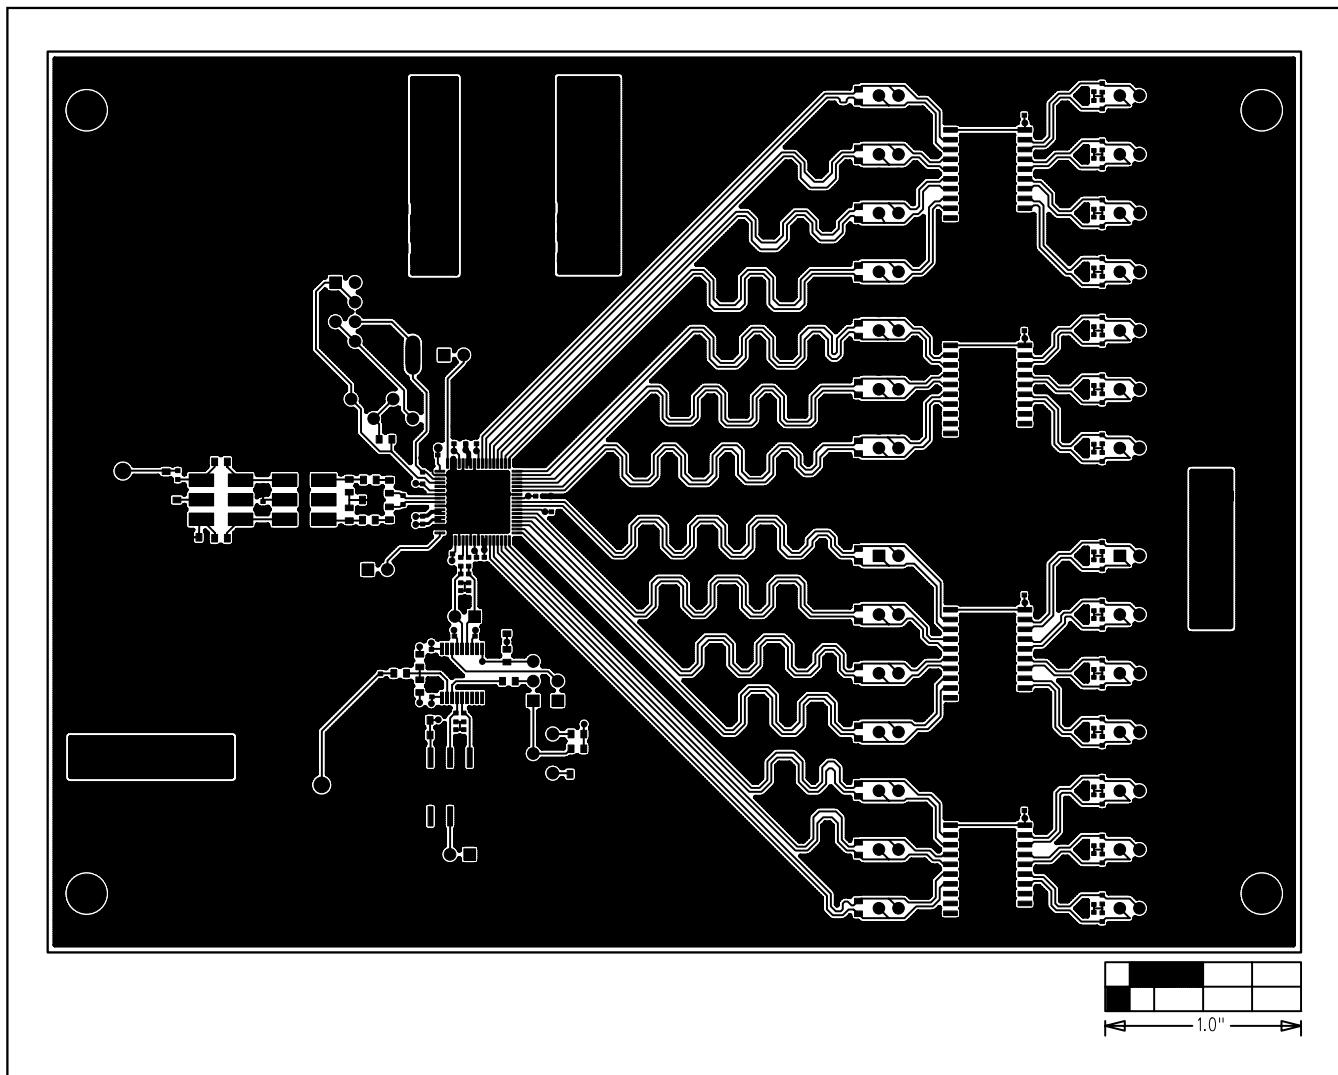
MAX1213N/MAX1214N EV Kit PC Board Layout—Component Side
